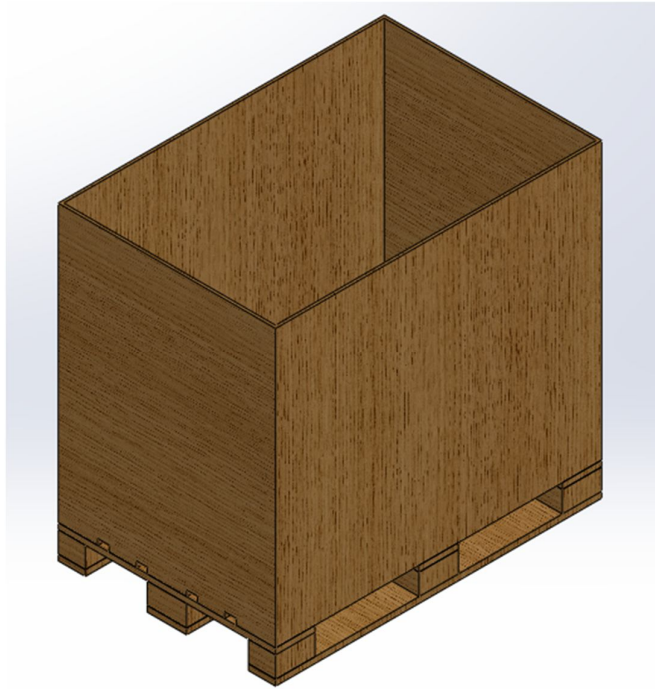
Cardboard box pallet 3D CAD (Source: Own)
